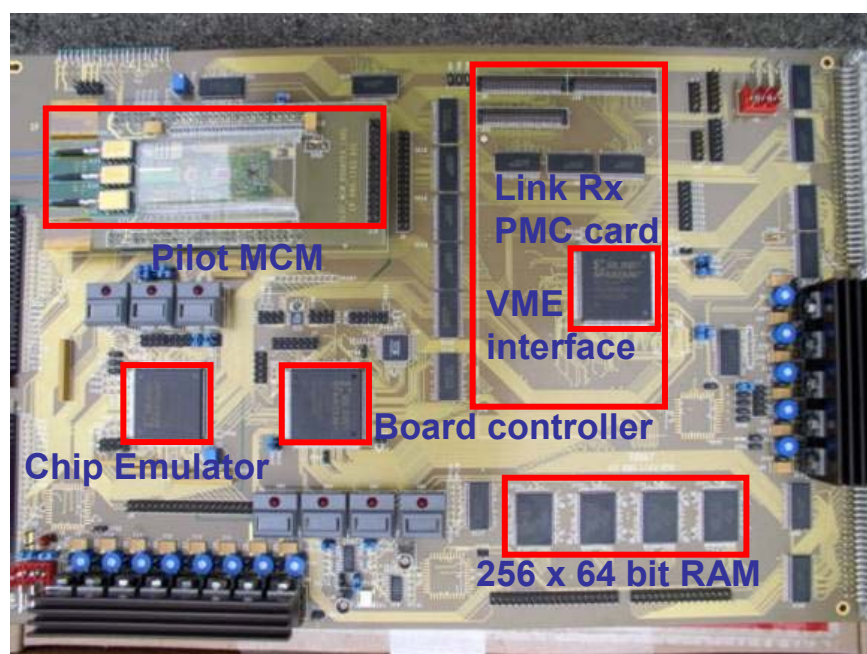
Picture of the Readout Test System Board (RUDOLF board).
